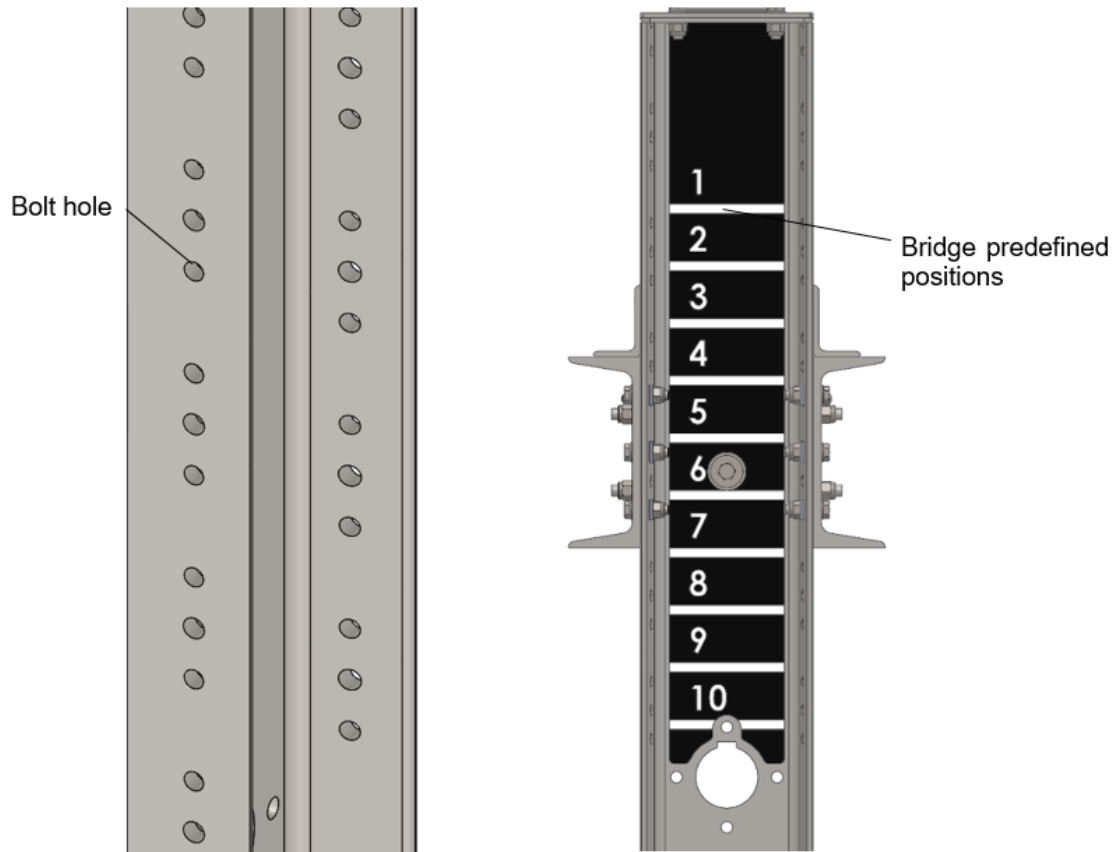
Holes to position the bridge along the columns and markings on the columns to help position the bridge
